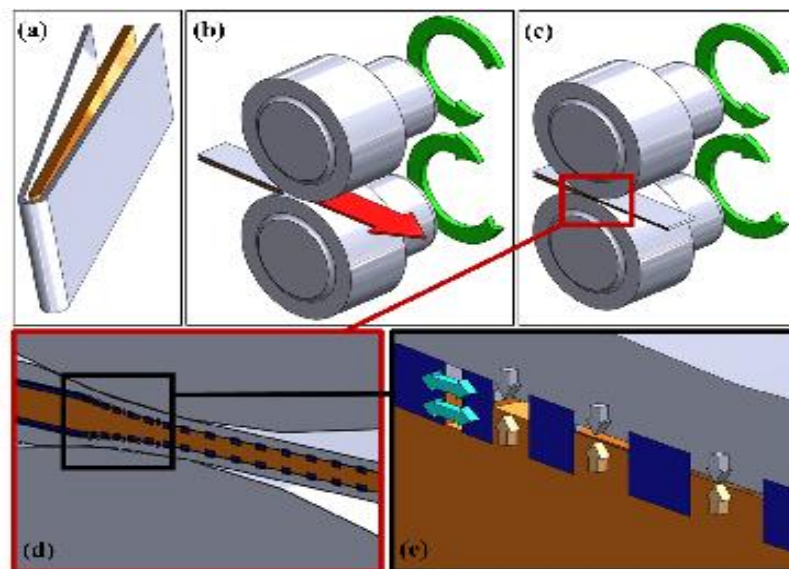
An example of the cold rolling process in the form of a schematic: a metal sandwich made up of just two components, b and c; the first cold rolling pass; d and e; a welding mechanism that takes place throughout the process: The brittle layer is shown to be peeling away in the direction of the horizontal arrows, while the healthy material is shown to be extruding in the direction of the vertical arrows [100].
